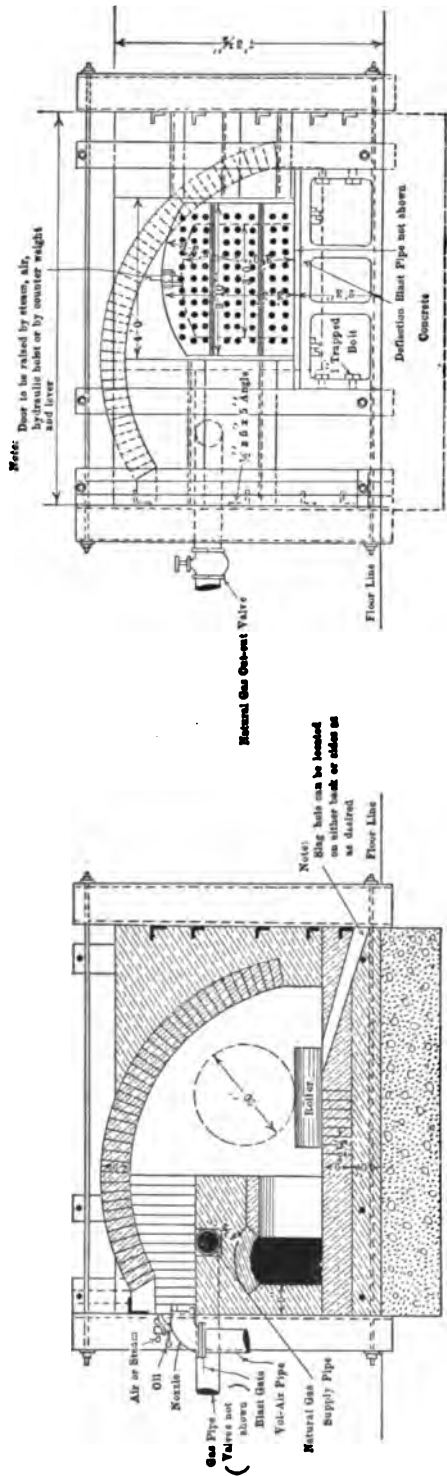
Modern billet-heating furnace for use of oil in combination with gas, or either fuel exclusively.
